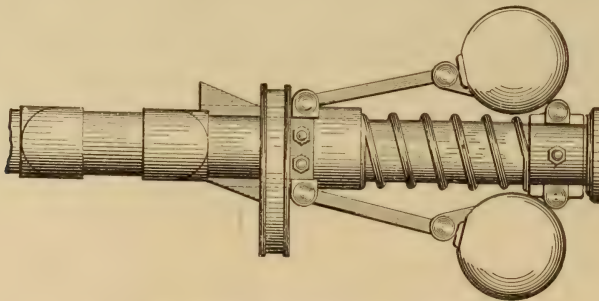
THE ROBEY CRANKSHAFT GOVERNOR, 1869.
